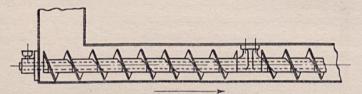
RIGHT-HAND WORM CONVEYOR.
